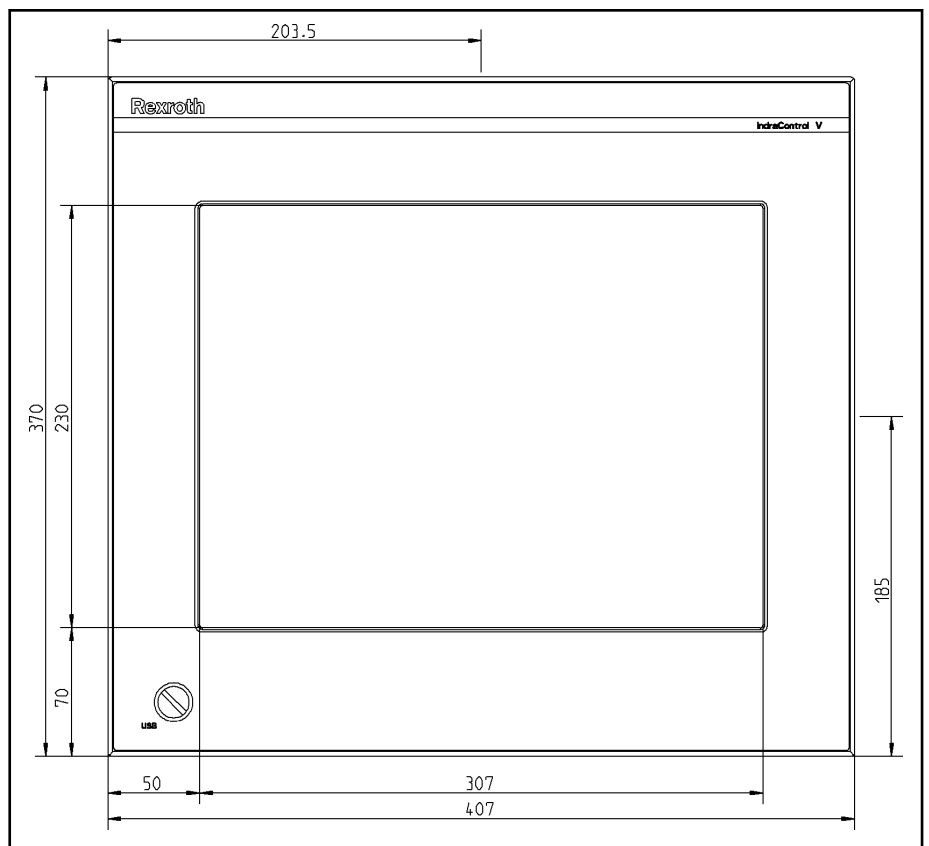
Dimensions: Front panel of the VDP 40.3BI devices
